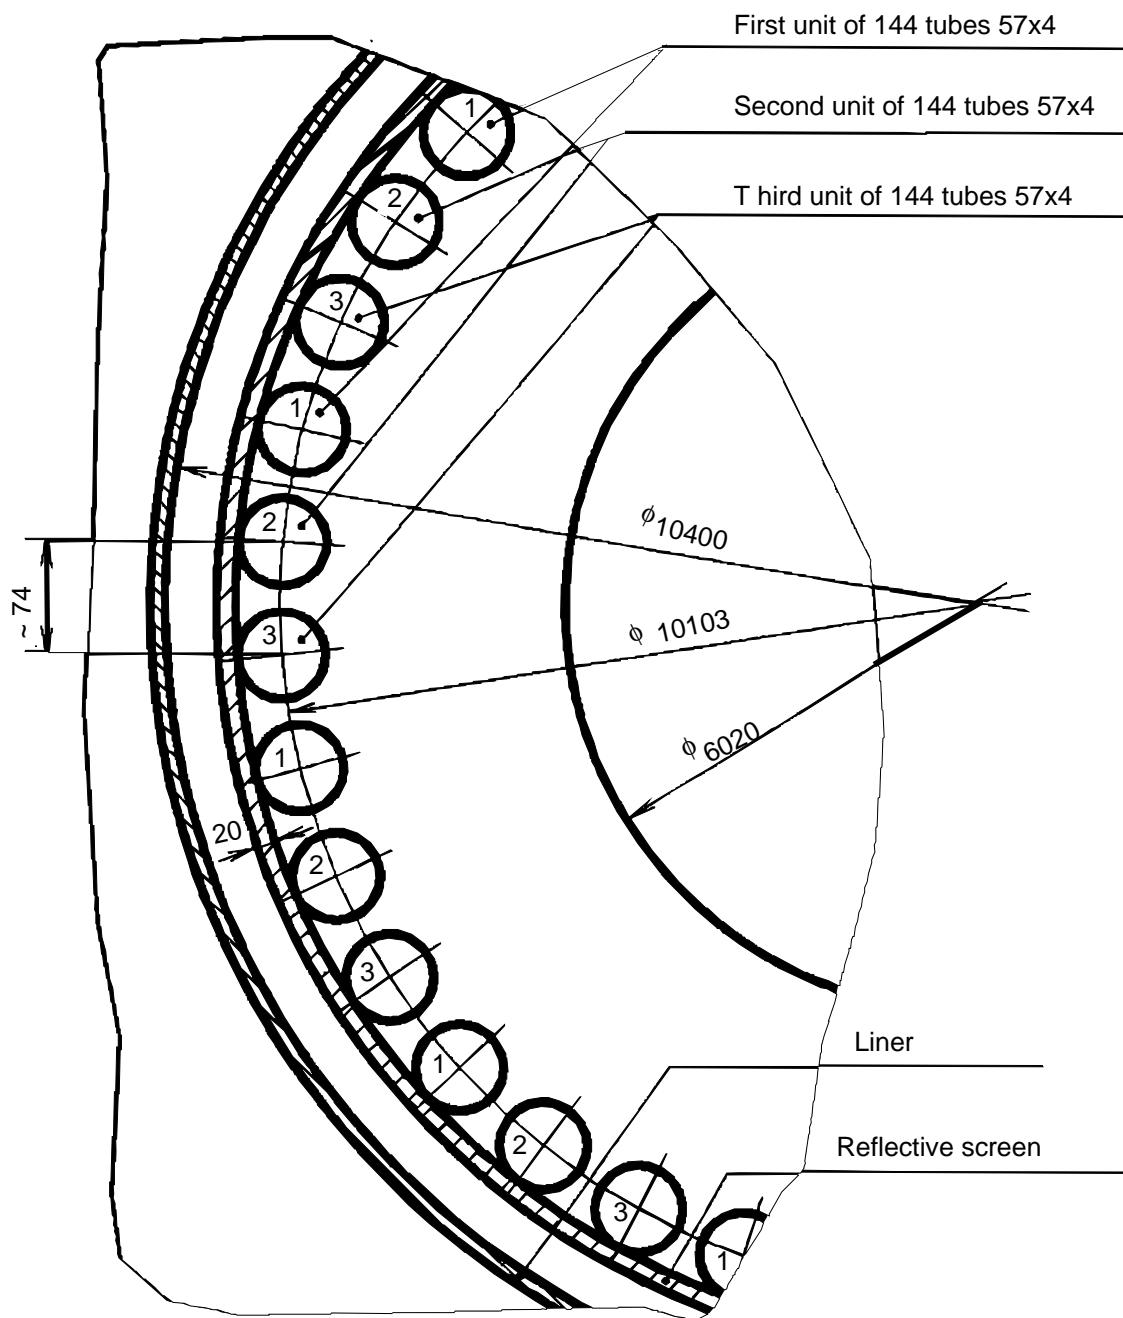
VGM surface cooler arrangement (dimensions mm)
